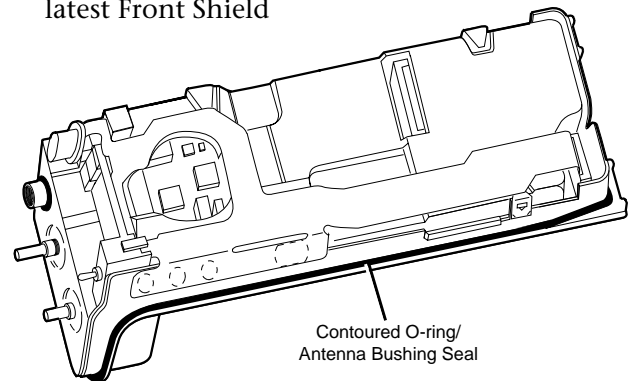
Installing the O-Ring/Antenna Bushing Seal
